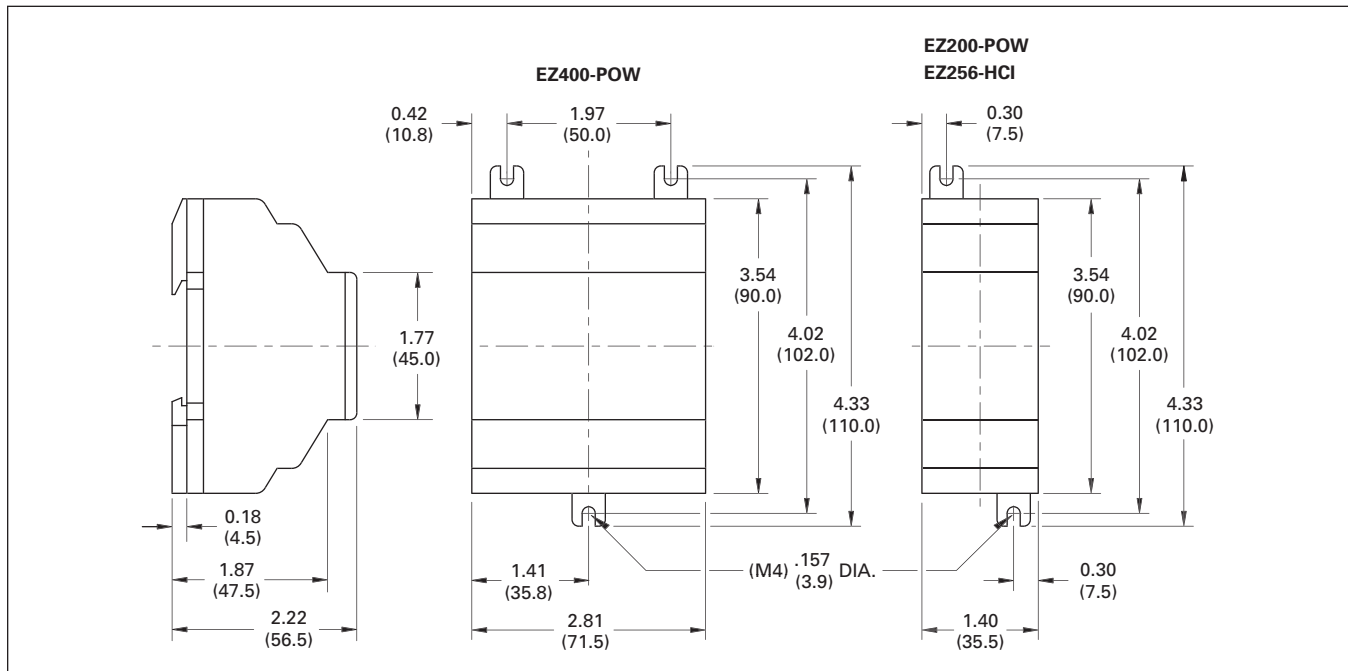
EZ200-POW/EZ256-HCI and EZ400-POW Series Dimensions in Inches (mm), Drawing Number MD05013004E
